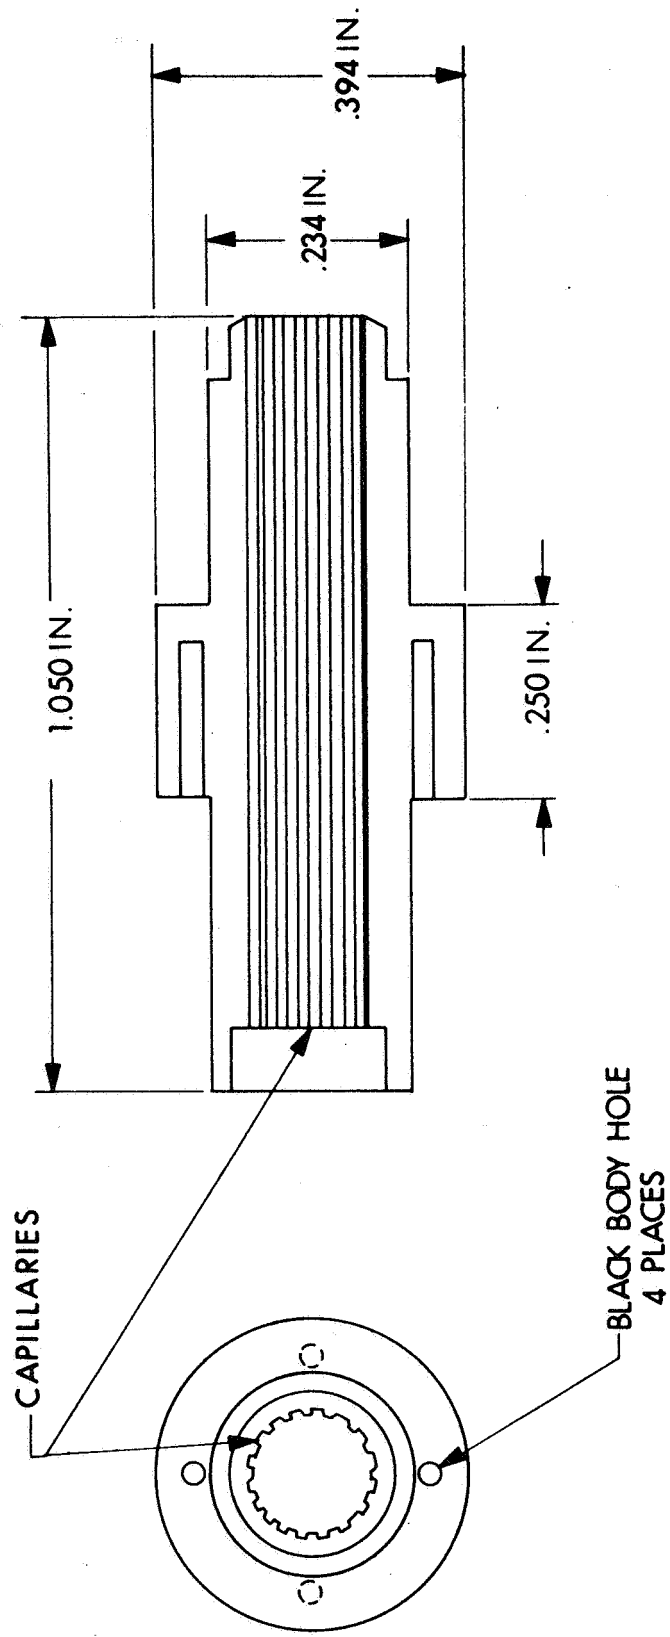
Vapor-Deposited Rhenium Emitter - Segmented Heat Assembly
